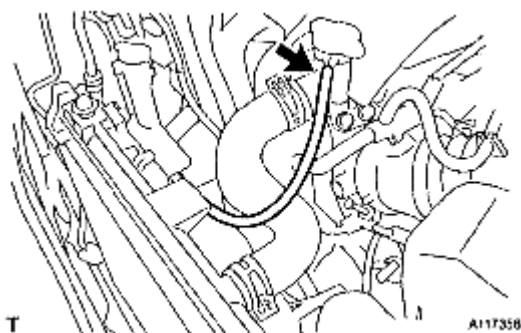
Locating Radiator Reservoir Tank Hose From Water Filler
